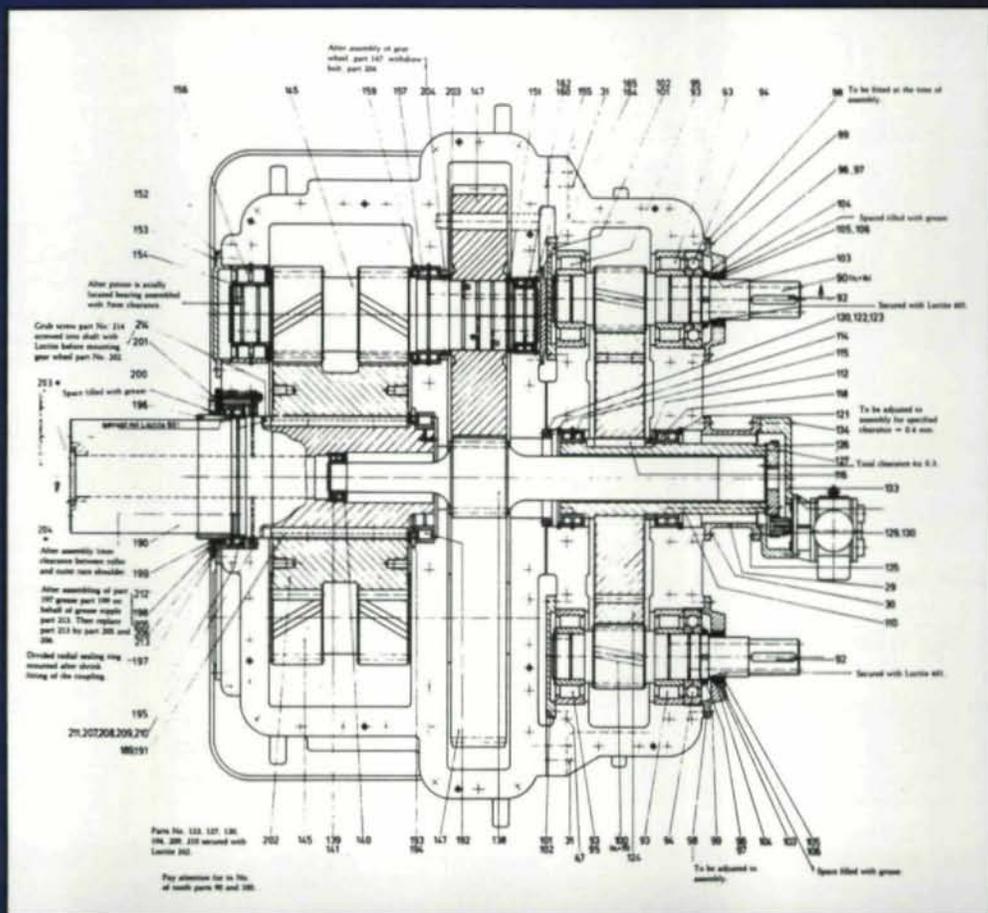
Tube mill central gear unit with two power branching stages. Transmission power $P = 4500$ kW; shaft speeds $n_1 = 490$ min⁻¹; $n_2 = 12.6$ min⁻¹; gear unit weight $G = 100$ t
